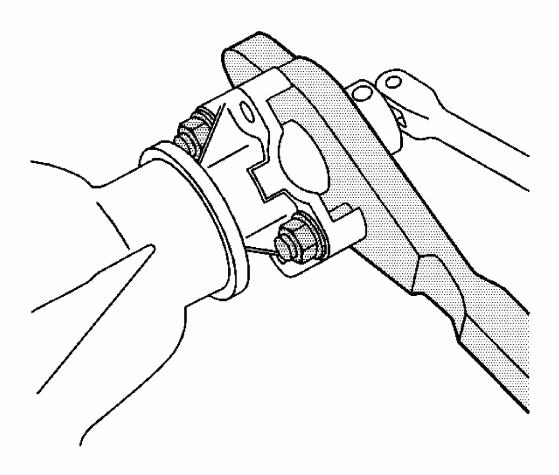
Holding Pinion Yoke With Special Tool Courtesy of GENERAL MOTORS CORP.
